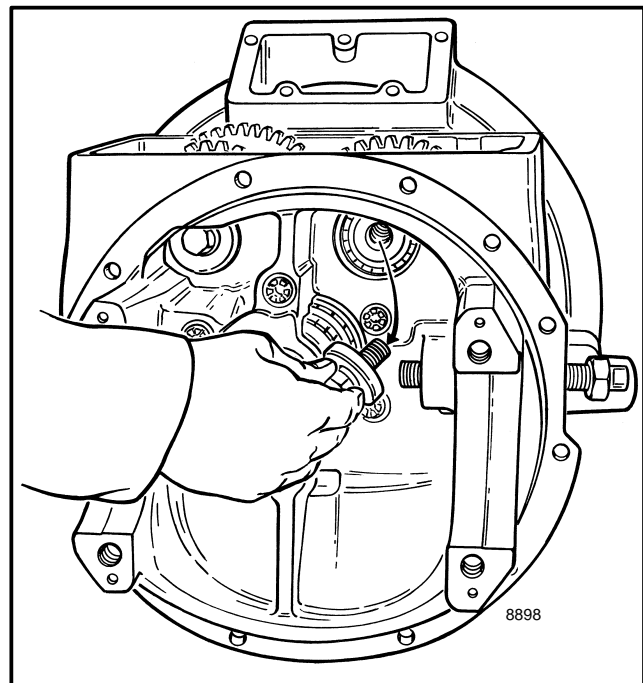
REMOVE CAPSCREWS AND WASHERS FROM MAIN SHAFTS
